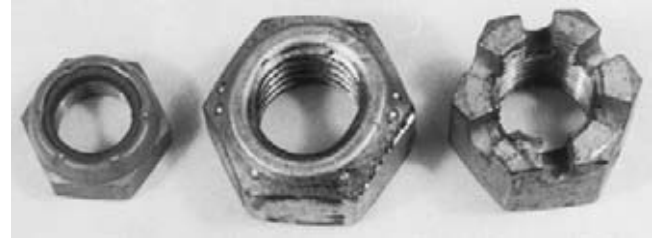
Types of lock nuts. On the left, a nylon ring; in the center, a distorted shape; and on the right, a castle used with a cotter key. (Courtesy of James Halderman)
